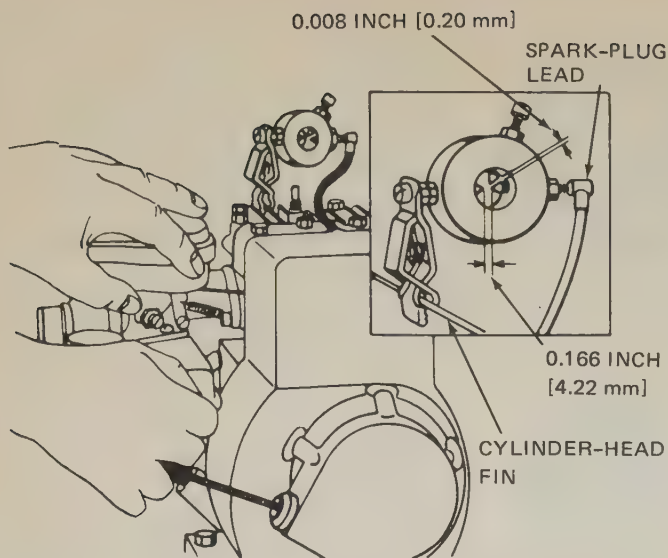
Checking the spark with a special spark-gap tester. (Briggs & Stratton Corporation)
